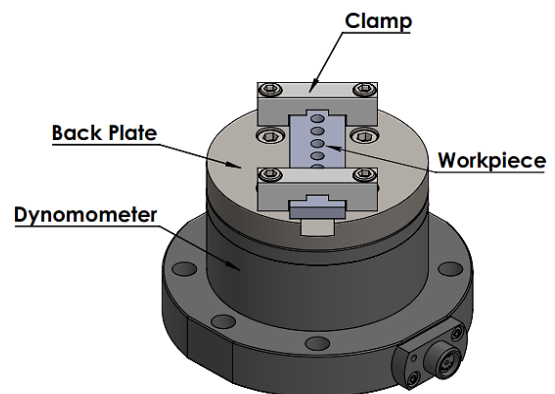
Fixture designed for workpiece clamping and fixed to the dynamometer with 4 bolts.
